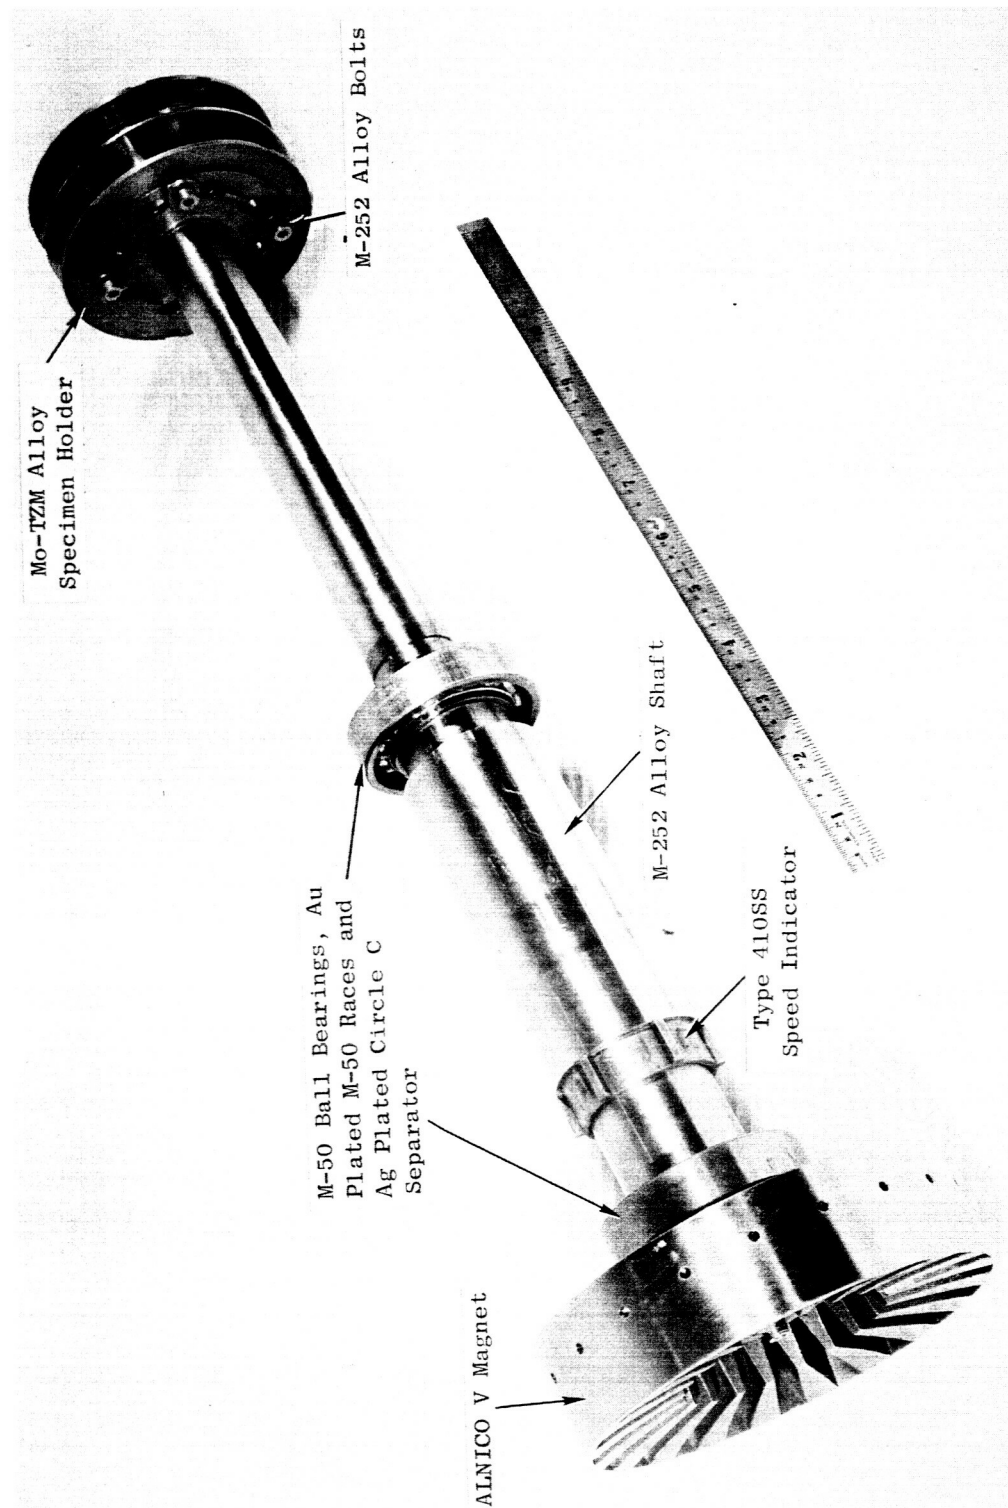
Main Shaft Assembly for High Vacuum Friction and Wear Tester.
